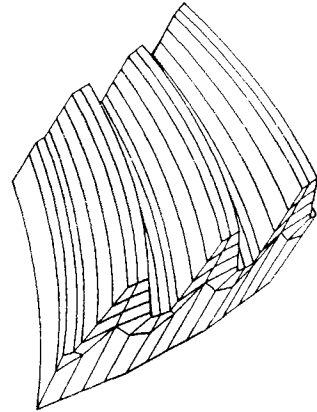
The three-tooth finite element model of the gear showing the active surfaces
